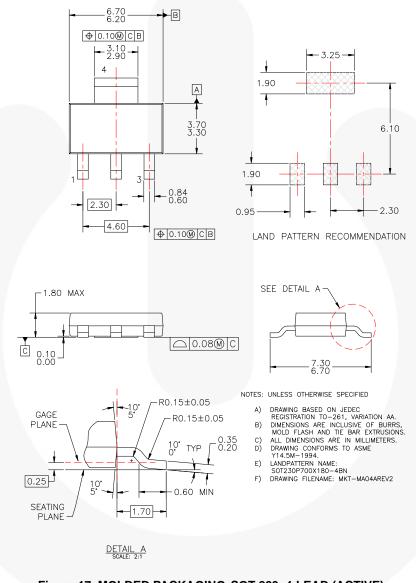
MOLDED PACKAGING, SOT-223, 4-LEAD (ACTIVE)
